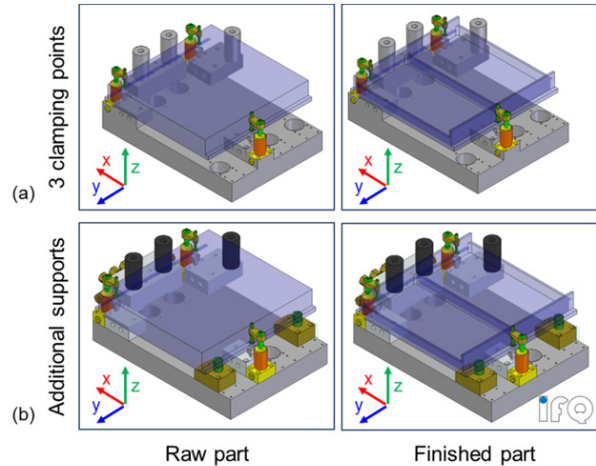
Re-configurable test fixture for exemplary machining experiments; (a) initial fixture setup with three clamping points, (b) configuration with two additional hydraulic supports
